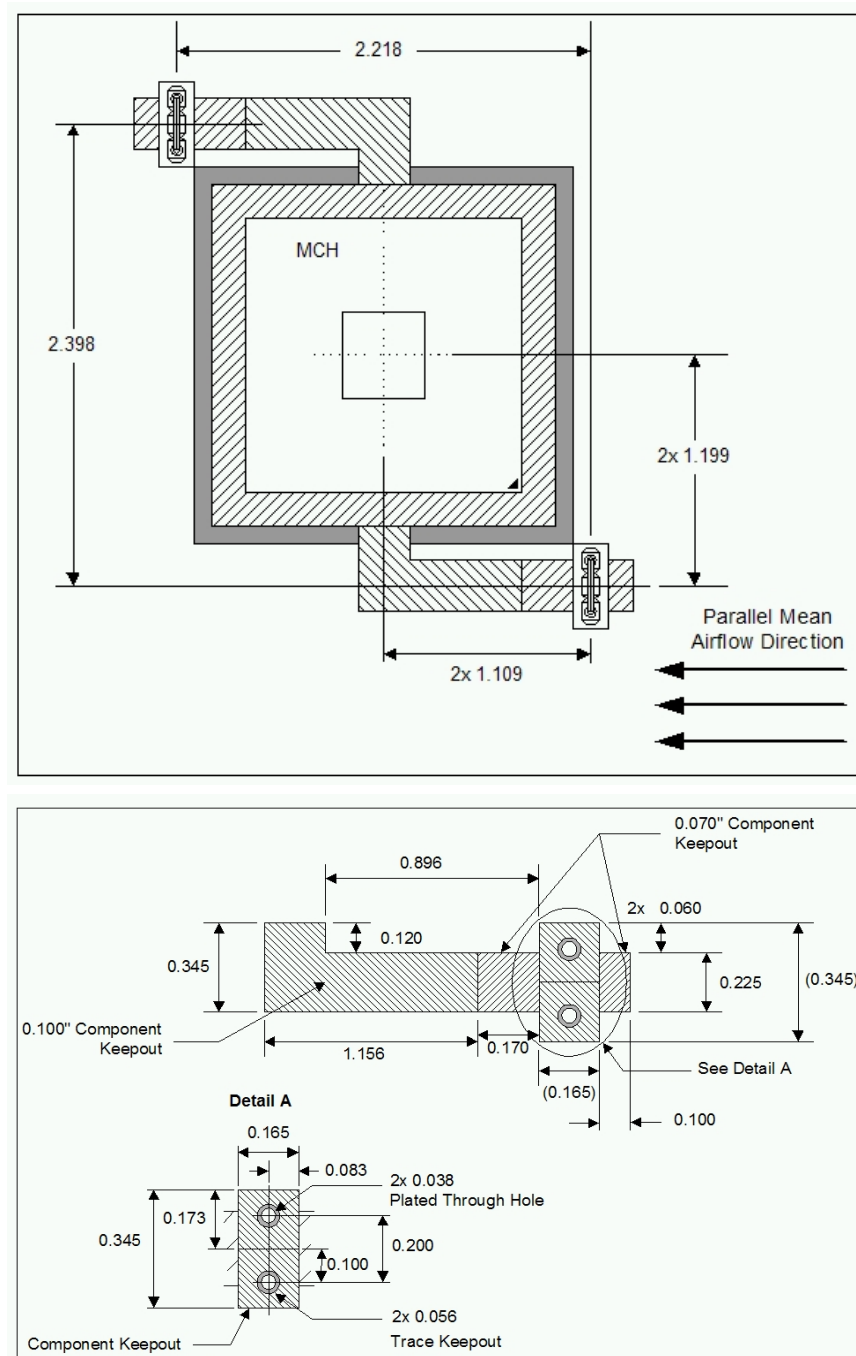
MCH Reference Heatsink Assembly for 1U/PICMG1.3 Platforms
